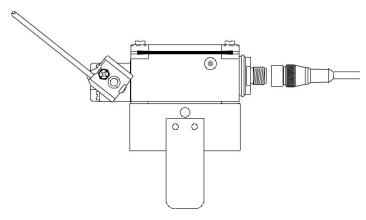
Lynx[™] Mold-Closed Limit Switch side view
